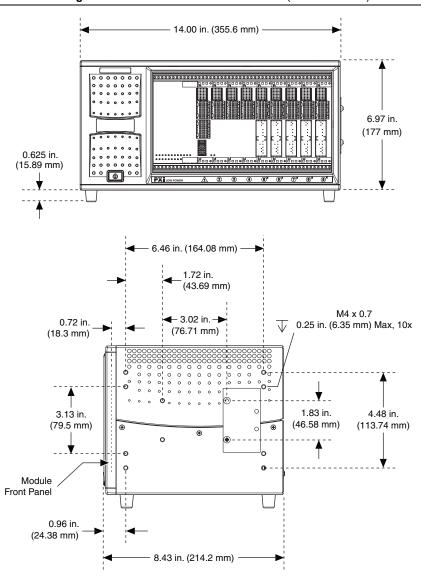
PXIe-1078 Chassis Dimensions (Front and Side)
